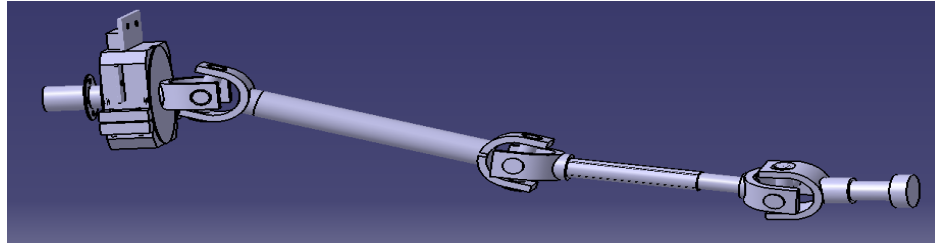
propeller shaft equipped with electromagnetic brake system
